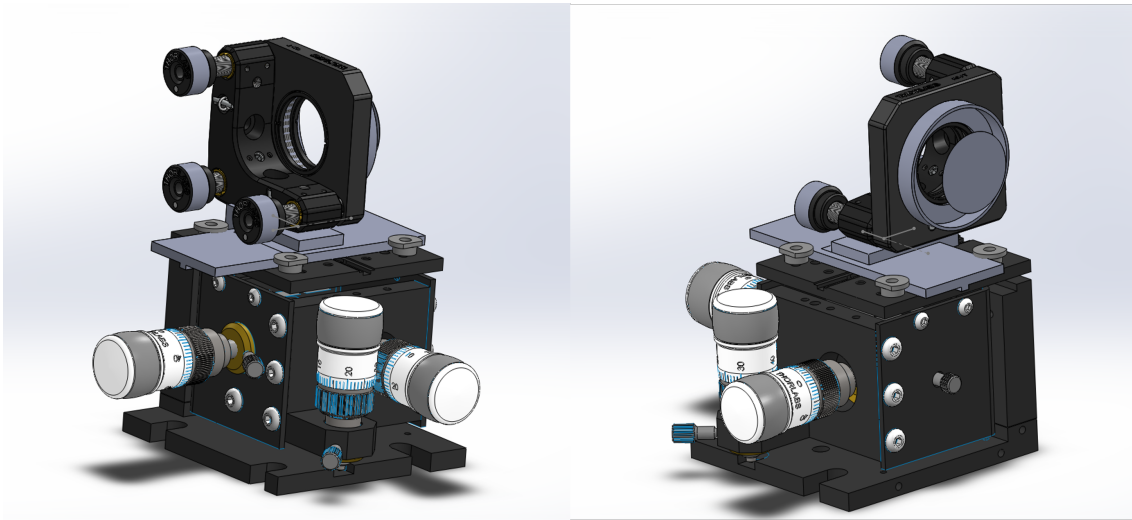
Upper tube lens module consisting of MicroBlock stage (MBT616D/M), mirror mount (KS1T) and custom-designed adapter. The same adapter as shown in figure 26 is used.
